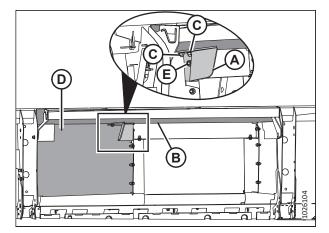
Gleaner[®] Bracket and Side Panel Installed
